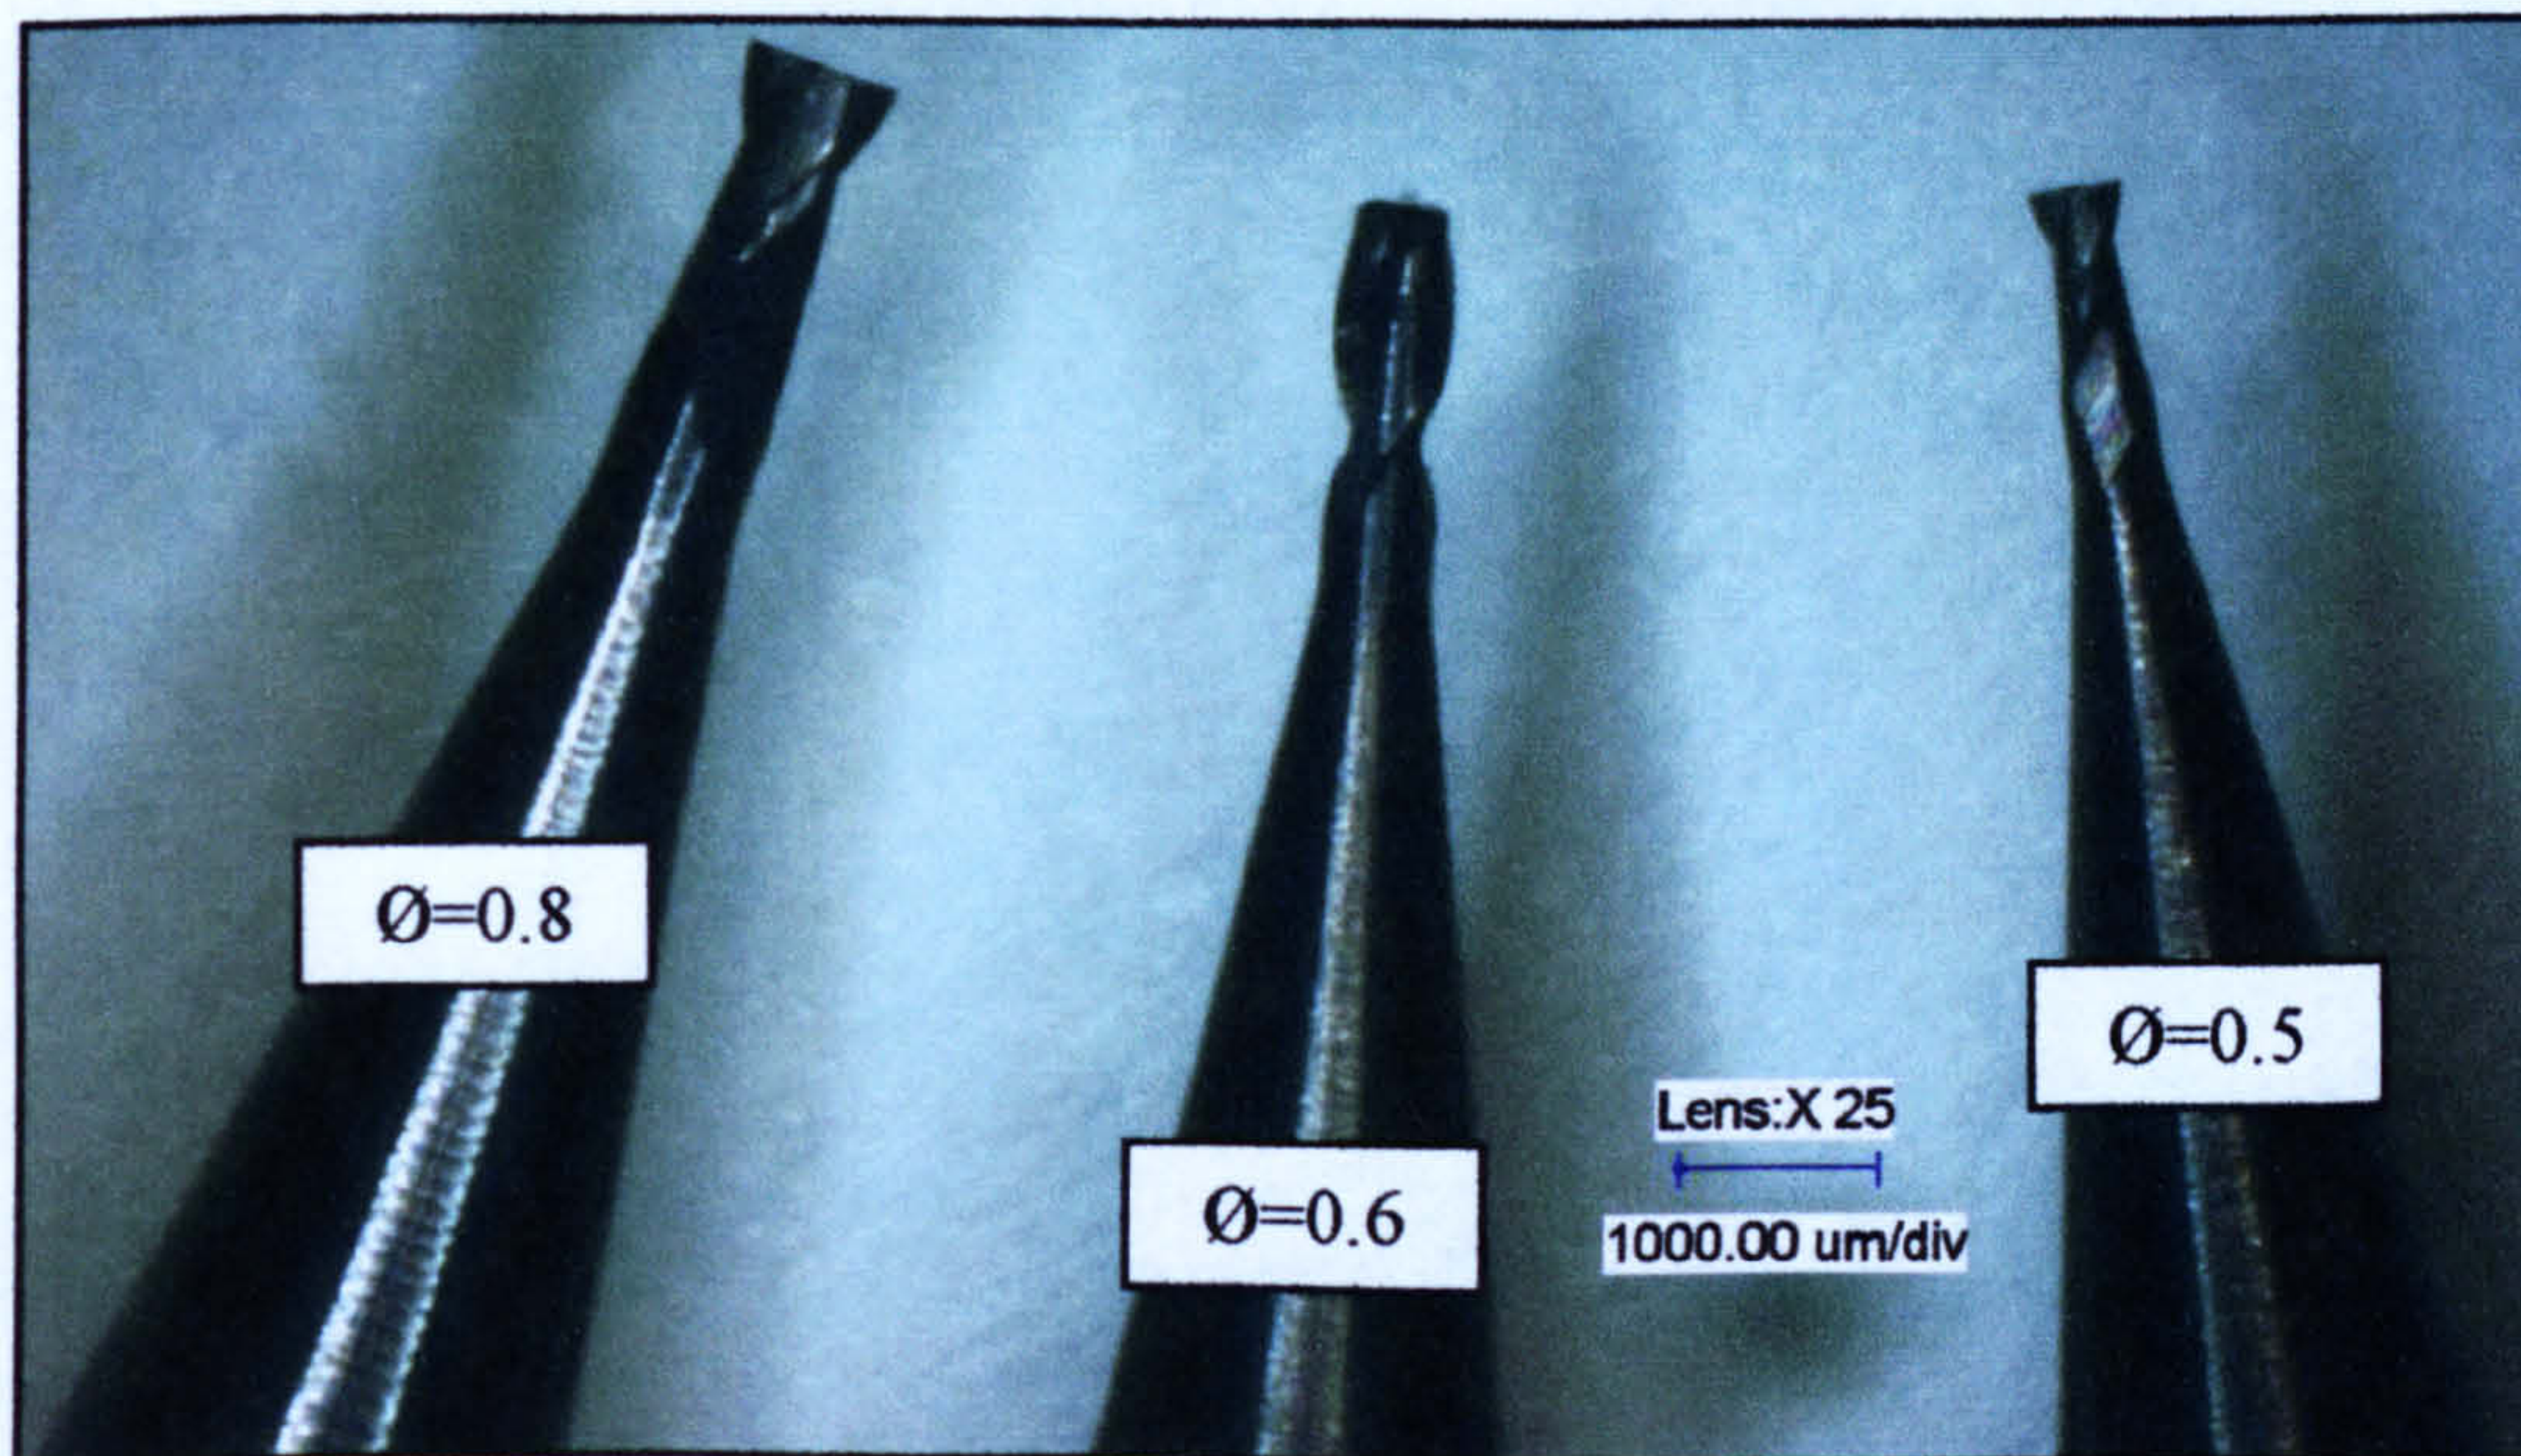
(a) Examples of micro-milling cutters employed in testing
